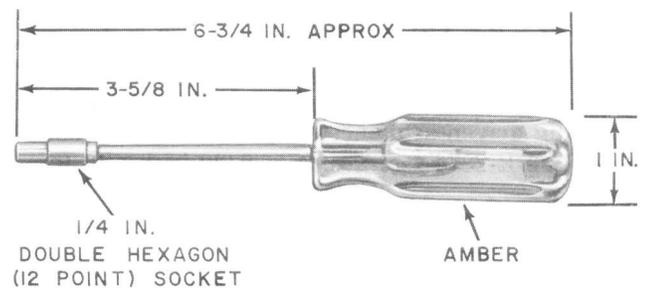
KS-20476, L1 or Utica V-780 Nut Driver and Socket
